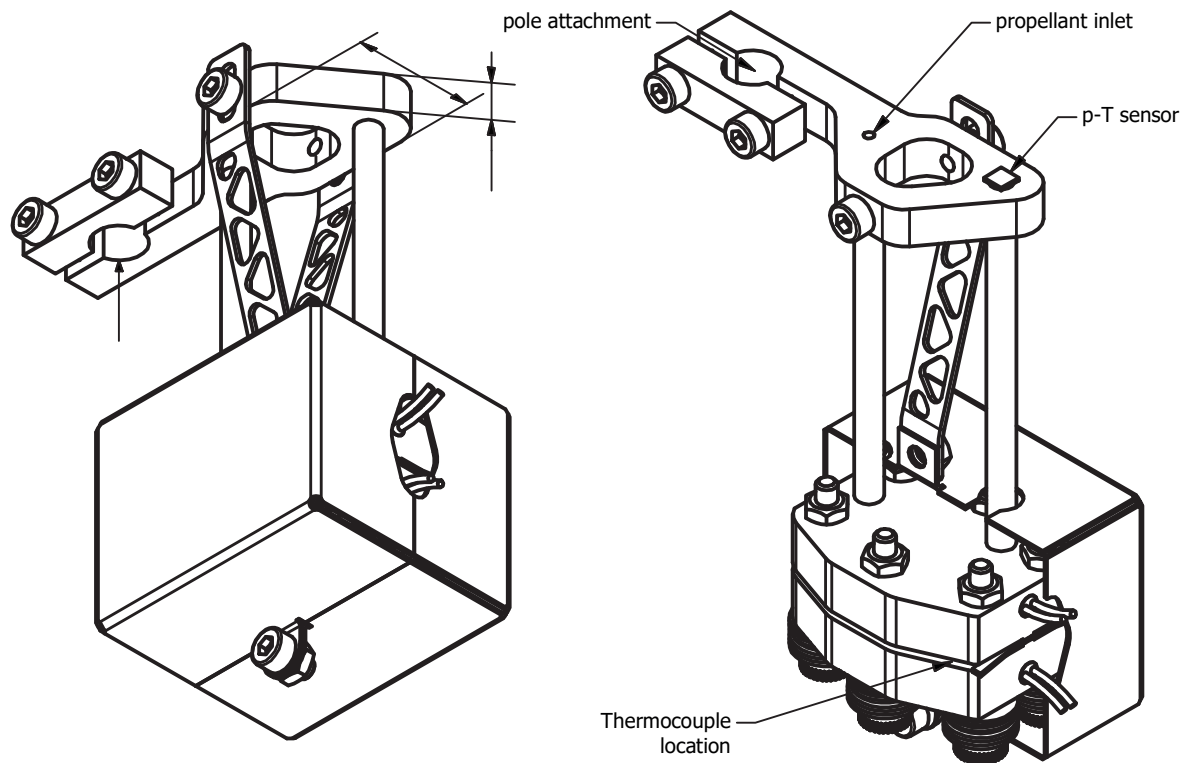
Schematic drawing of fully assembled thruster design, viewed from the bottom (left) and top with half of the radiation shield removed (right)
